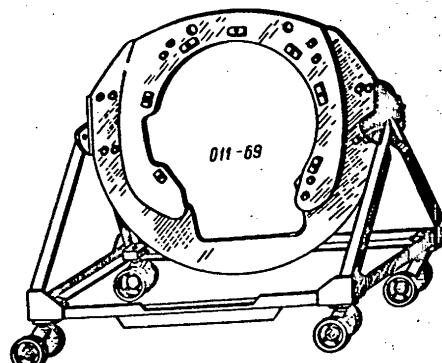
STAND WITH ADJUSTABLE PLATE FOR ENGINE ASSEMBLY AND DISASSEMBLY
